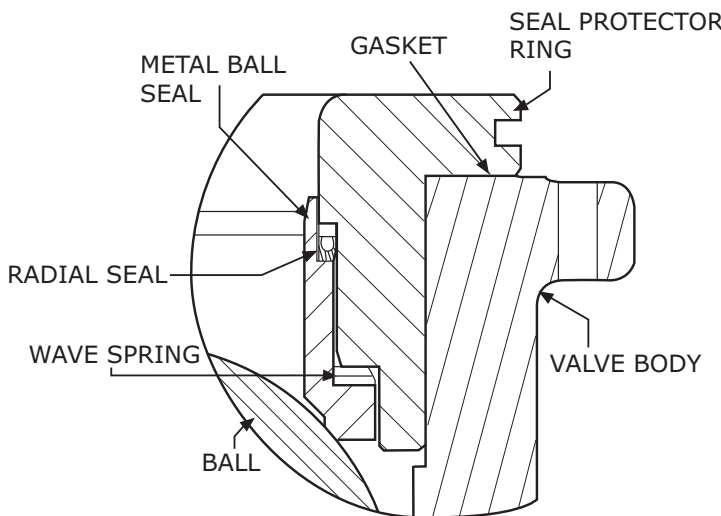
Ball Seal Assembly Diagrams for Valve Sizes 2 Through 12 Inch
